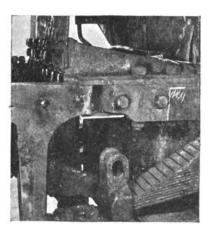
Fractured Locomotive Side Frame Cutout with Graphite Electrode and Ready for Welding Courtesy of C. & C. Electric and Manufacturing Company
